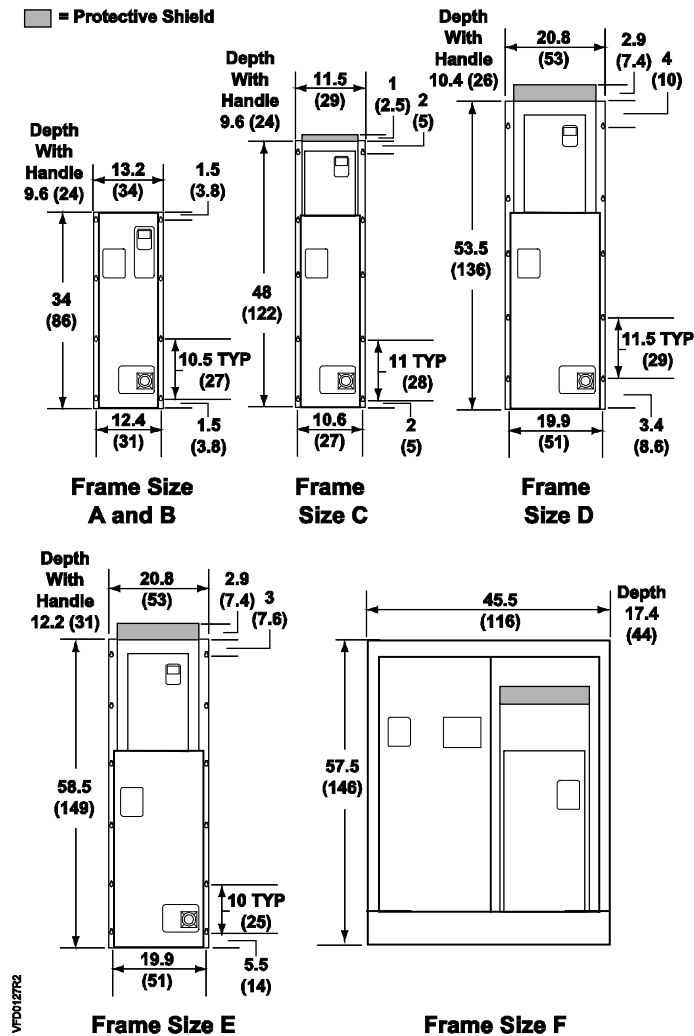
C-Bypass Mounting and Overall Dimensions in Inches (Centimeters).
